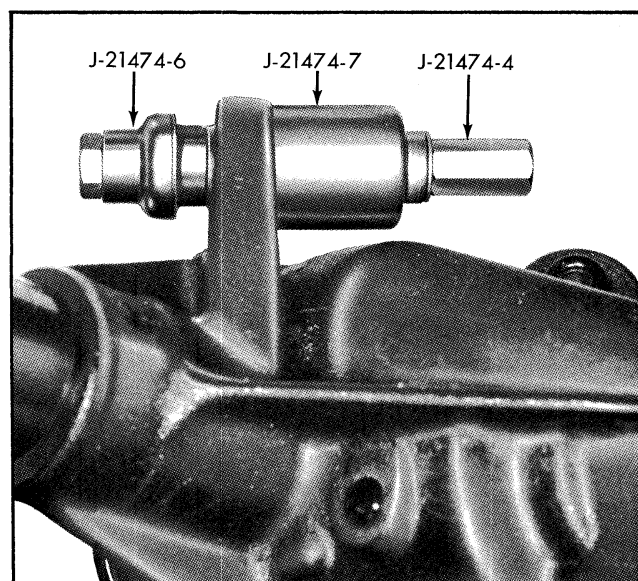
Installing Rear Upper Control Arm Rear Bushing
